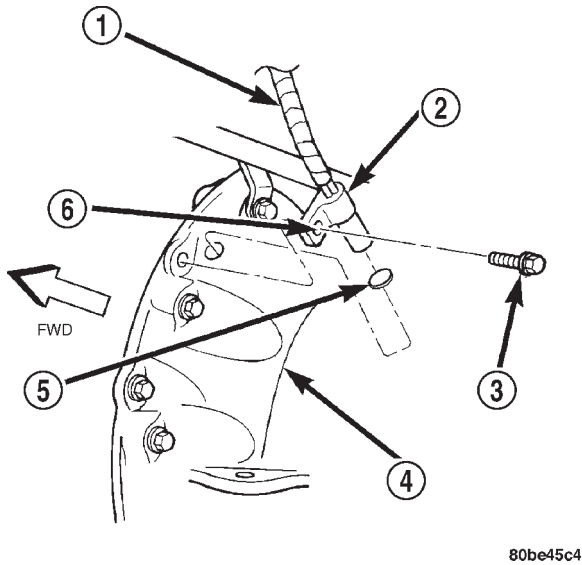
Crankshaft Position Sensor—One-Bolt Mounting
